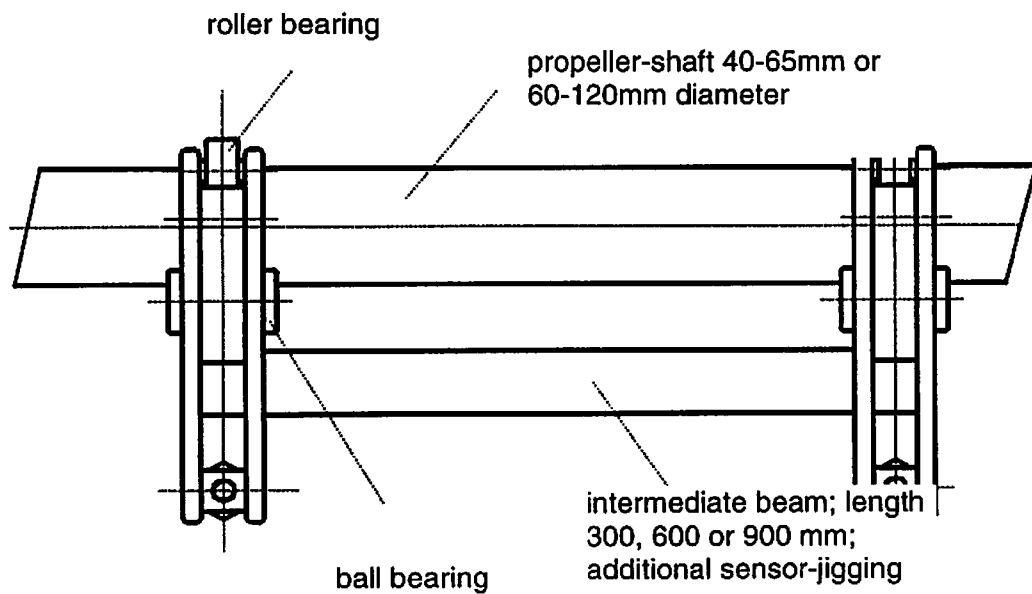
Portable sensor holder with double-6-fold bearing, side view
